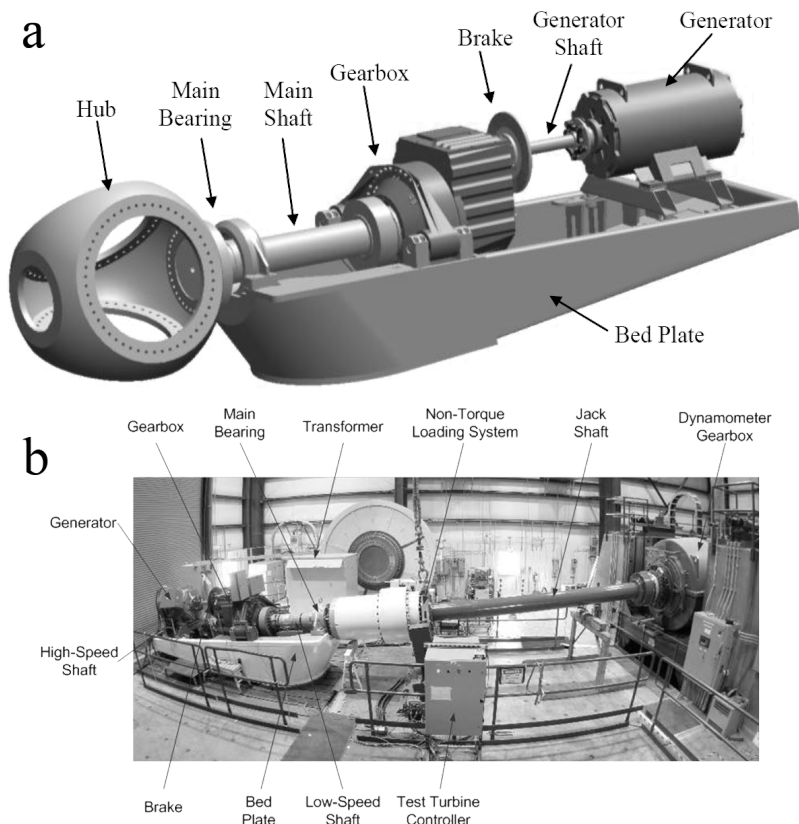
(a) Drive train configuration of the test turbine. (b) NREL dynamometer test stand with the turbine installed.
